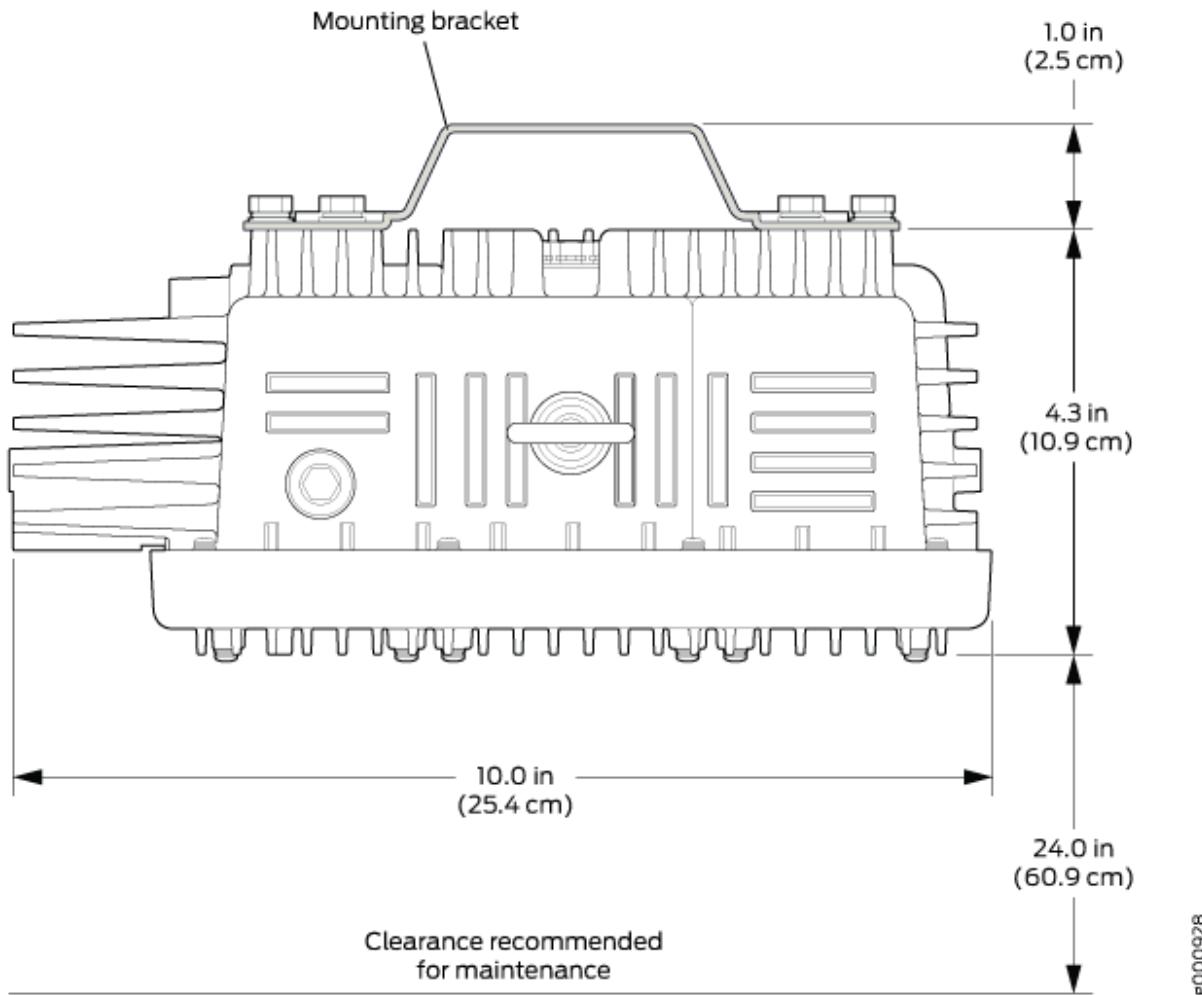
ACX500 Outdoor Router Chassis Dimensions and Clearance Requirements—Top View
